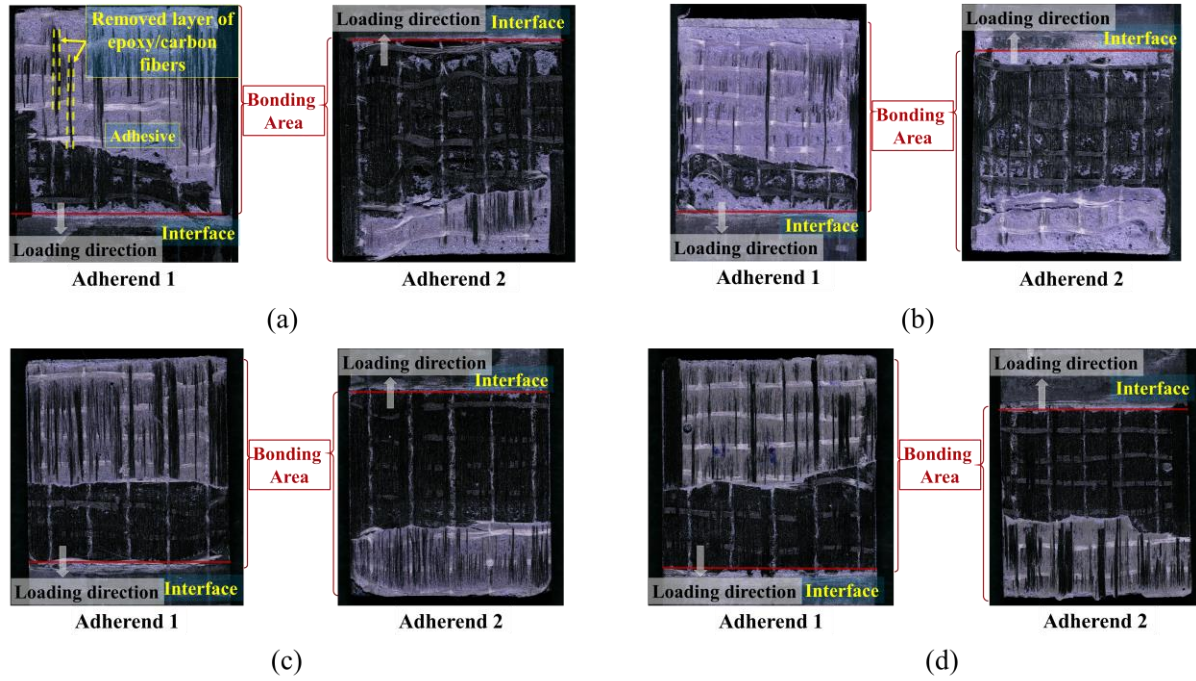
The fracture surfaces of SLJ specimens comprising an adherend with a [0]₇ laminate with different surface treatments: (a) acetone, (b) sandpaper, (c) low-pressure grit blasting, and (d) high-pressure grit blasting.
